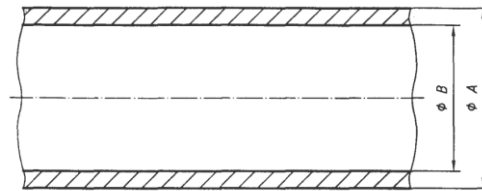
WIRELINE CORE BARREL INNER TUBE (LOWER END)
